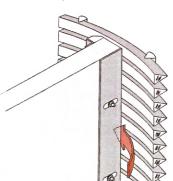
Wedge Wire Straining Element Cross-Section with Adjustable Accelerator Plate
